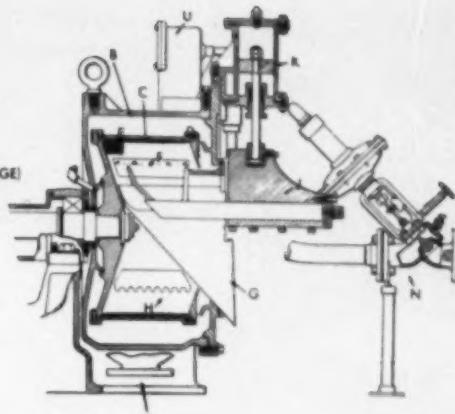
Cross section of Sharples Super-D-Hydrator.
